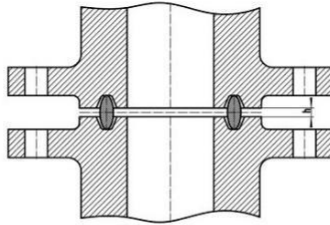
a RTJ joint consisting of two RTJ flanges and a metallic ring gasket which rests in the ring-joint groove.
